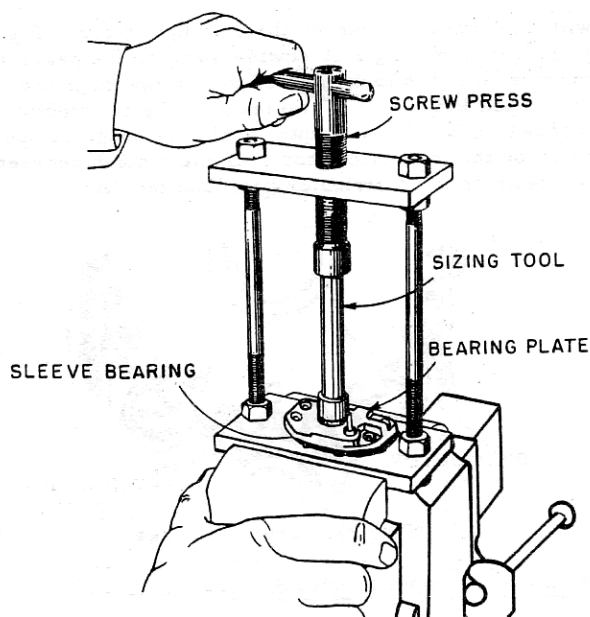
Pressing Sleeve Bearing into Bearing Support
